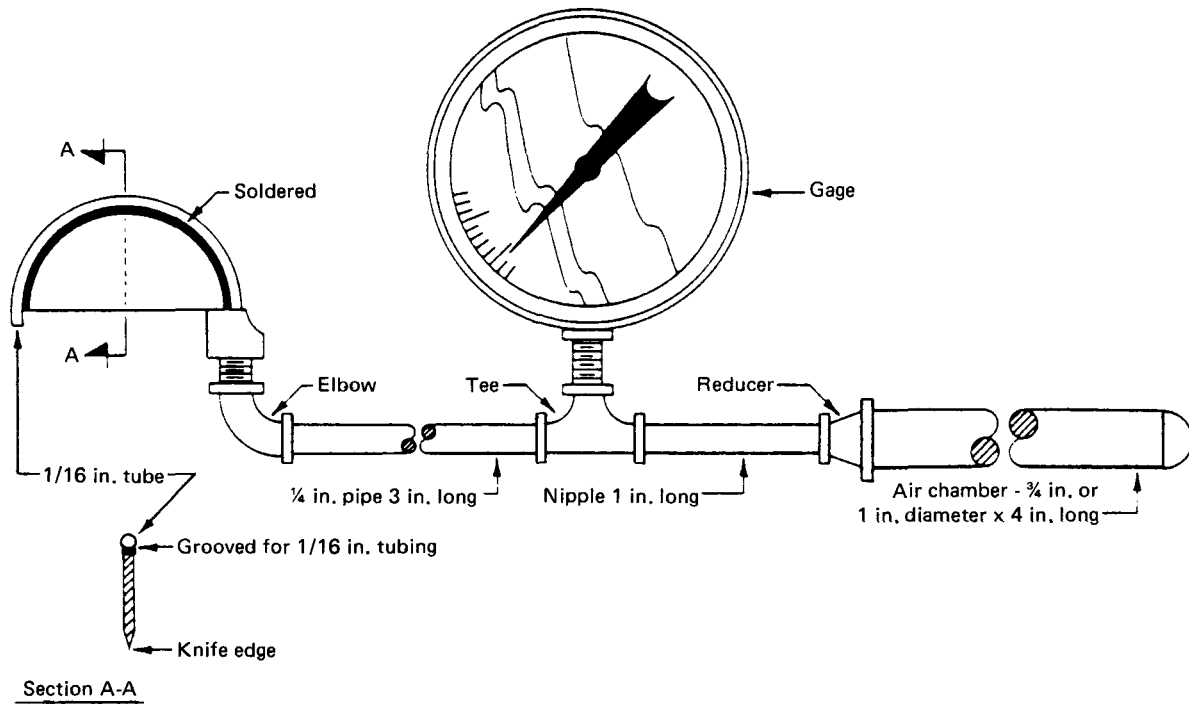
(b) Pitot tube assembly.
